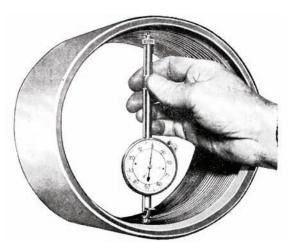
Typical Internal-Thread Taper Gauge for Threads in Sizes  $4^{1/2}$  and Larger
